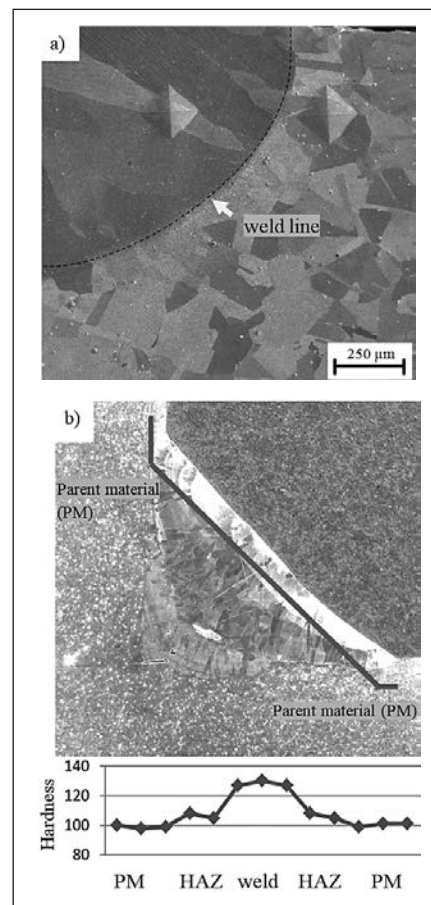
(a) Macrostructure of a welded tee joint on 6-mm thick nickel sheet; (b) weld microstructure
